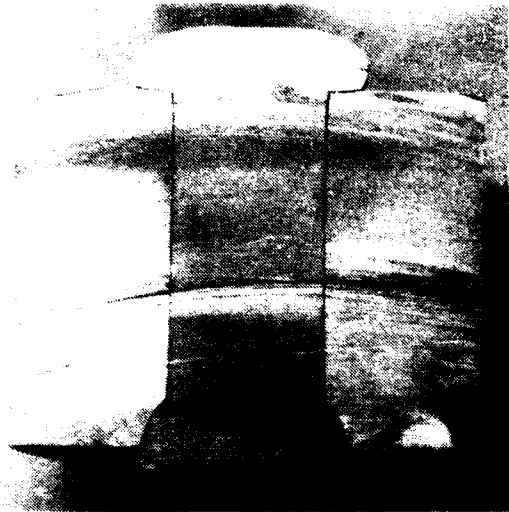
Photograph of the sectioned rivet test sample.
